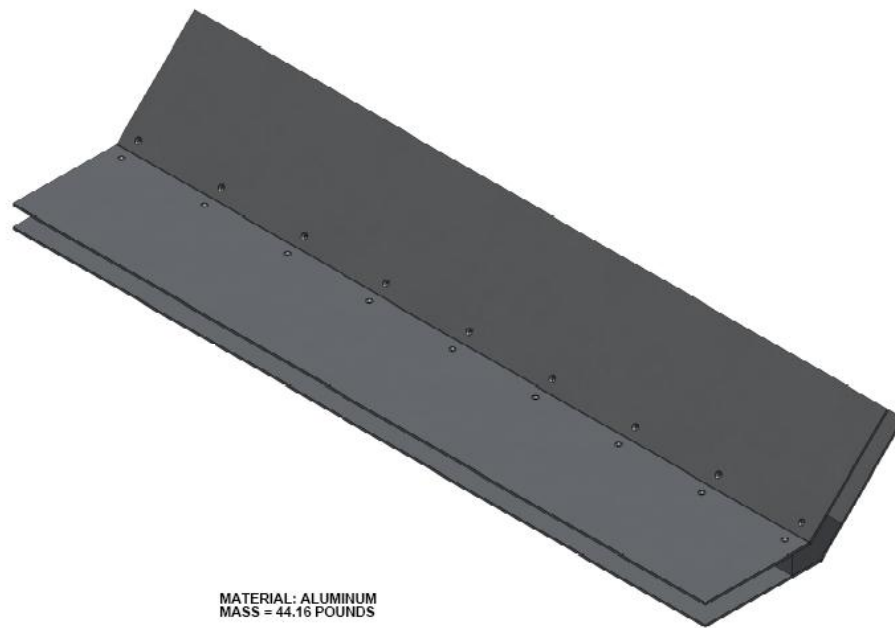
Straight sleeve joint specifications, dimensions in inches.
